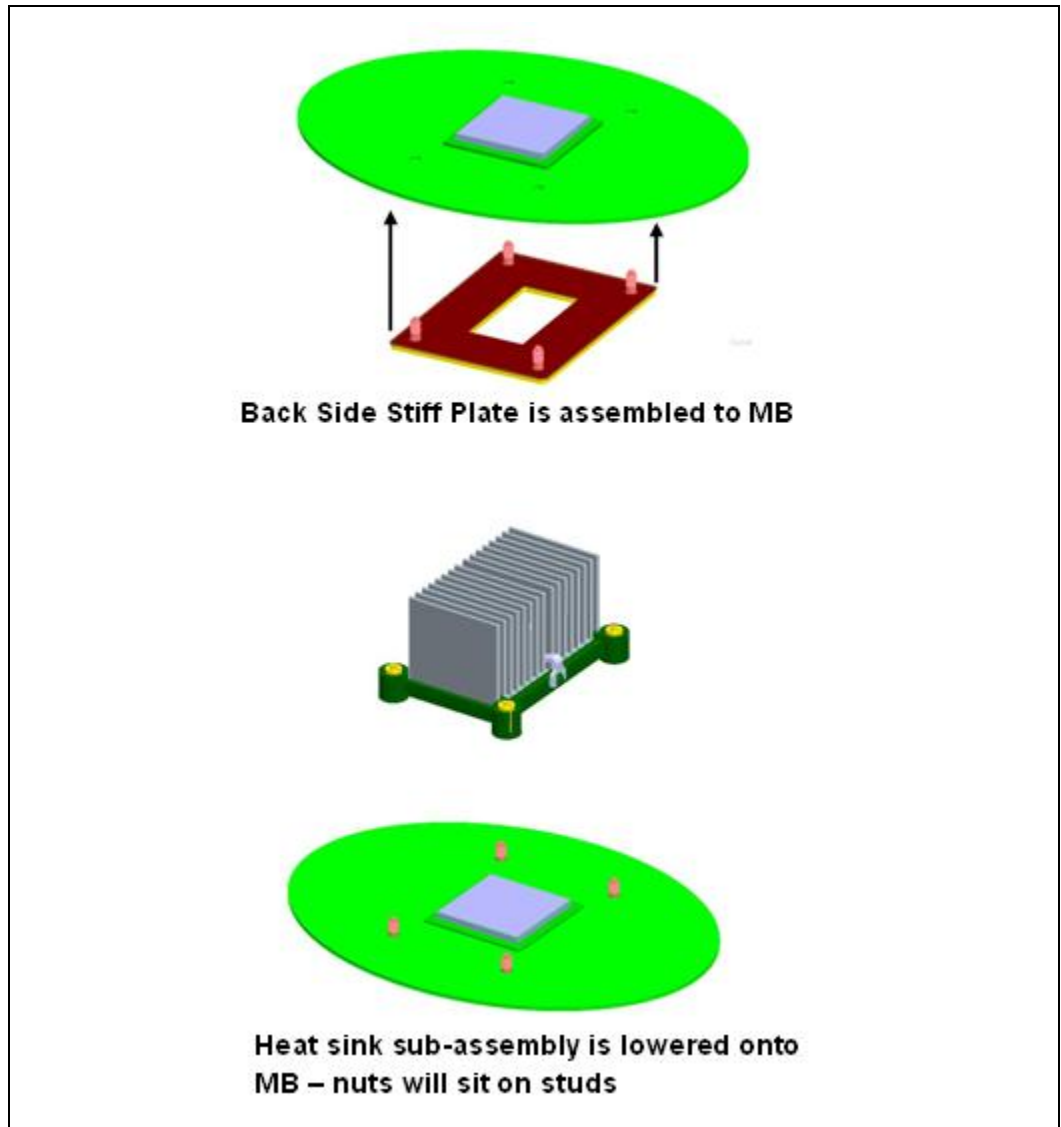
Reference Heatsink Assembly Steps – Heatsink Assembly
